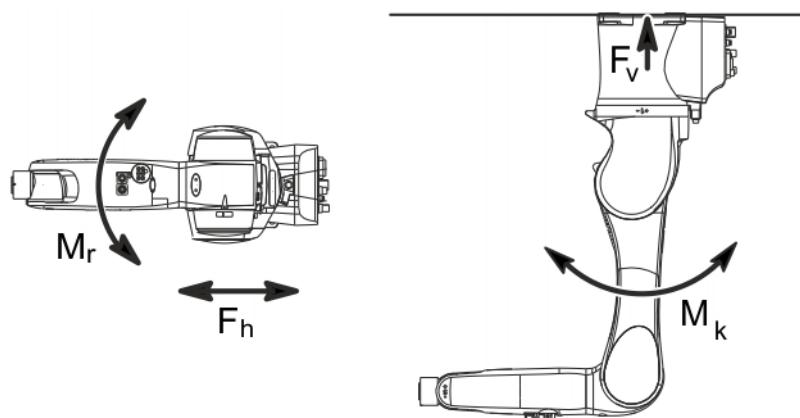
Loads acting on the foundation, ceiling mounting
